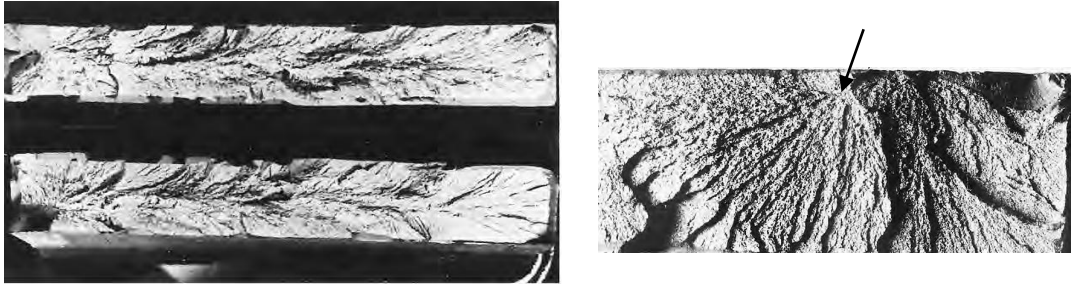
(a) Photograph showing V-shaped “chevron” markings characteristic of brittle fracture. Arrows indicate origin of crack. Approximately actual size. (b) Photograph of a brittle fracture surface showing radial fan-shaped ridges. Arrow indicates origin of crack. Approximately 2x. ((a) From R.W. Hertzberg, *Deformation and Fracture Mechanics of Engineering Materials*, 3rd edition. Copyright © 1989 by John Wiley & Sons, New York. Reprinted by permission of John Wiley & Sons, Inc. Photograph courtesy of Roger Slutter, Lehigh University. (b) Reproduced with permission from D. J.Wulpi, *Understanding How Components Fail*, American Society for Metals, Materials Park, OH, 1985.)
